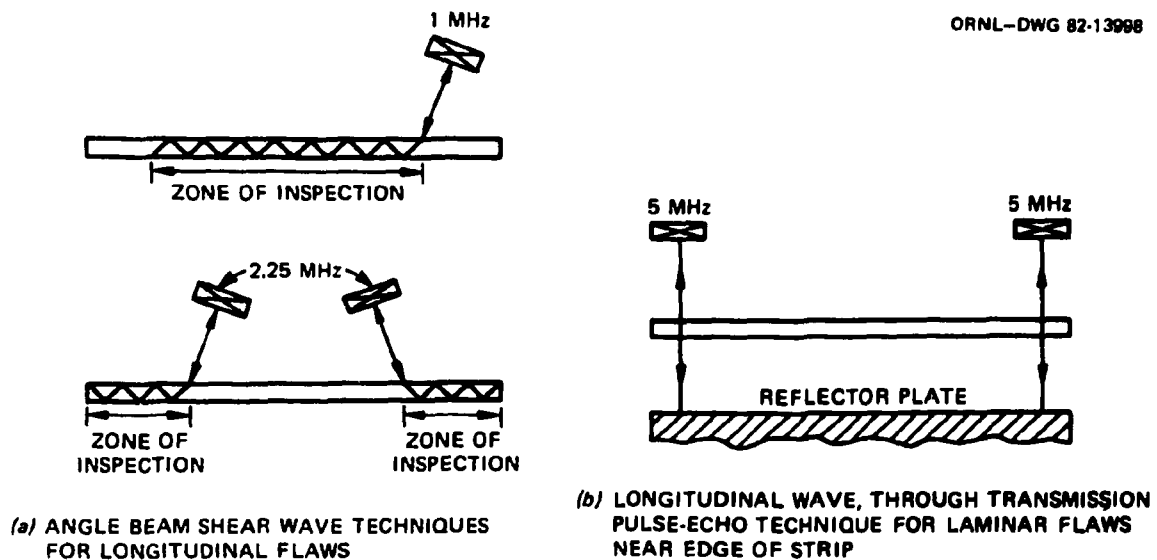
Ultrasonic techniques for JBK-75 strip.
